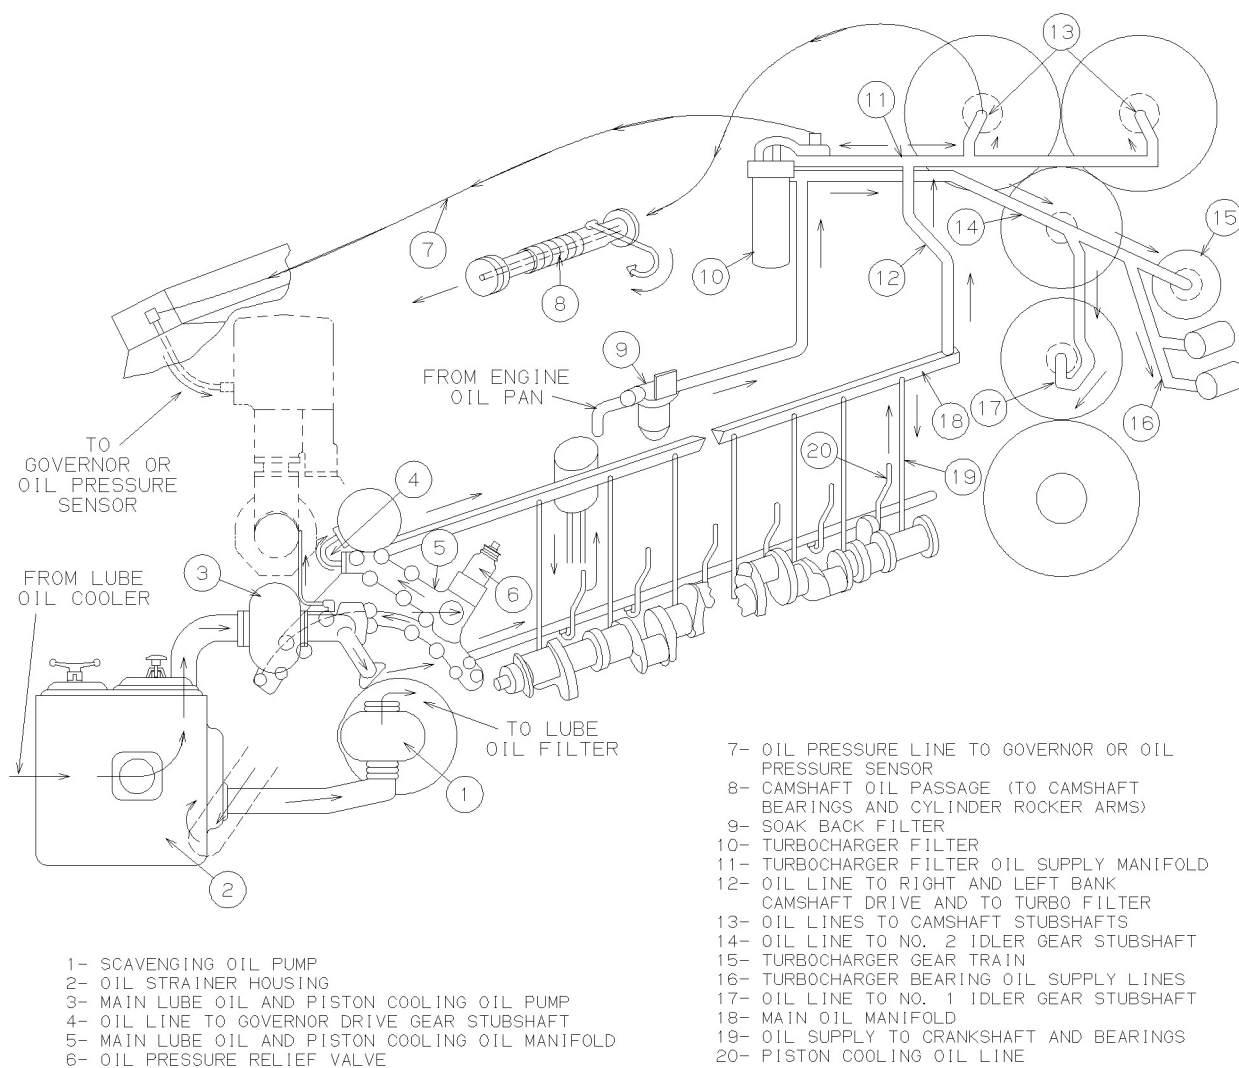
Typical Lubricating Oil System (8, 12, or 16-Cylinder Governor Controlled Engine Shown)
